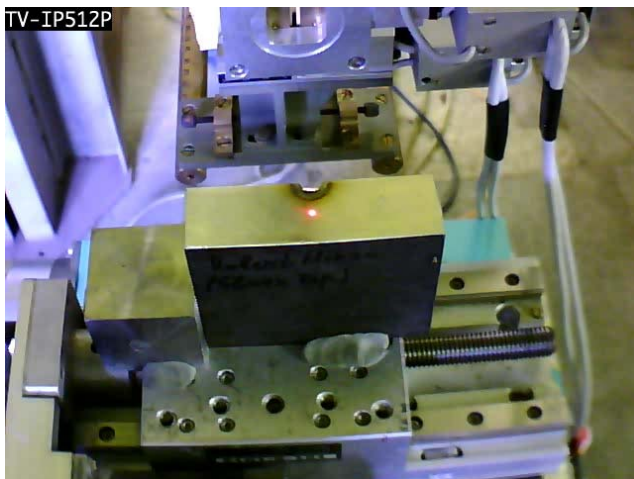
Studied sample with 2 weld beads on FSD.
